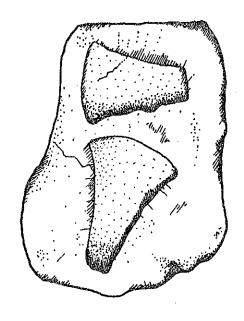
A block containing two 'open' moulds for casting copper axe-heads, from Ballyglisheen, Co. Carlow, Ireland
